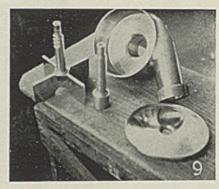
Centrifugal pump fabricated from stainless plate and bar stock by welding. Mirror finished welds are almost impossible to detect
